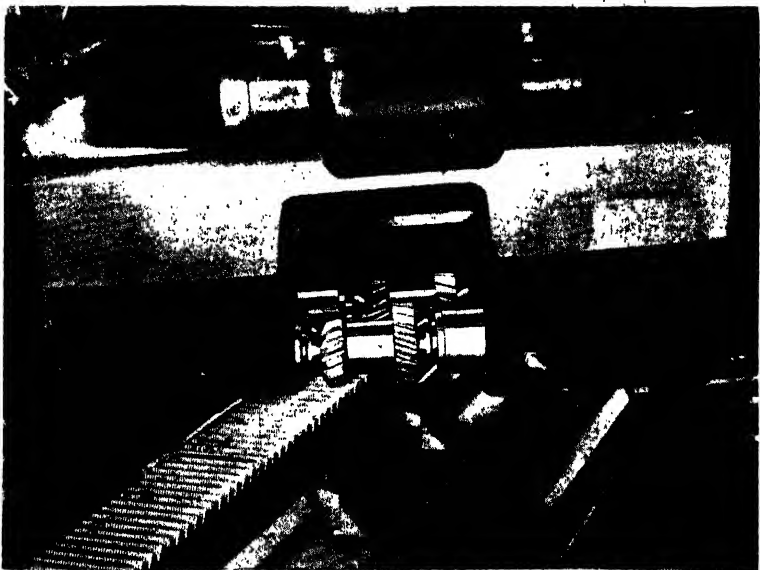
Gear Shaving Machine with Special Work-head that Enables Two Gears to be Shaved Simultaneously
